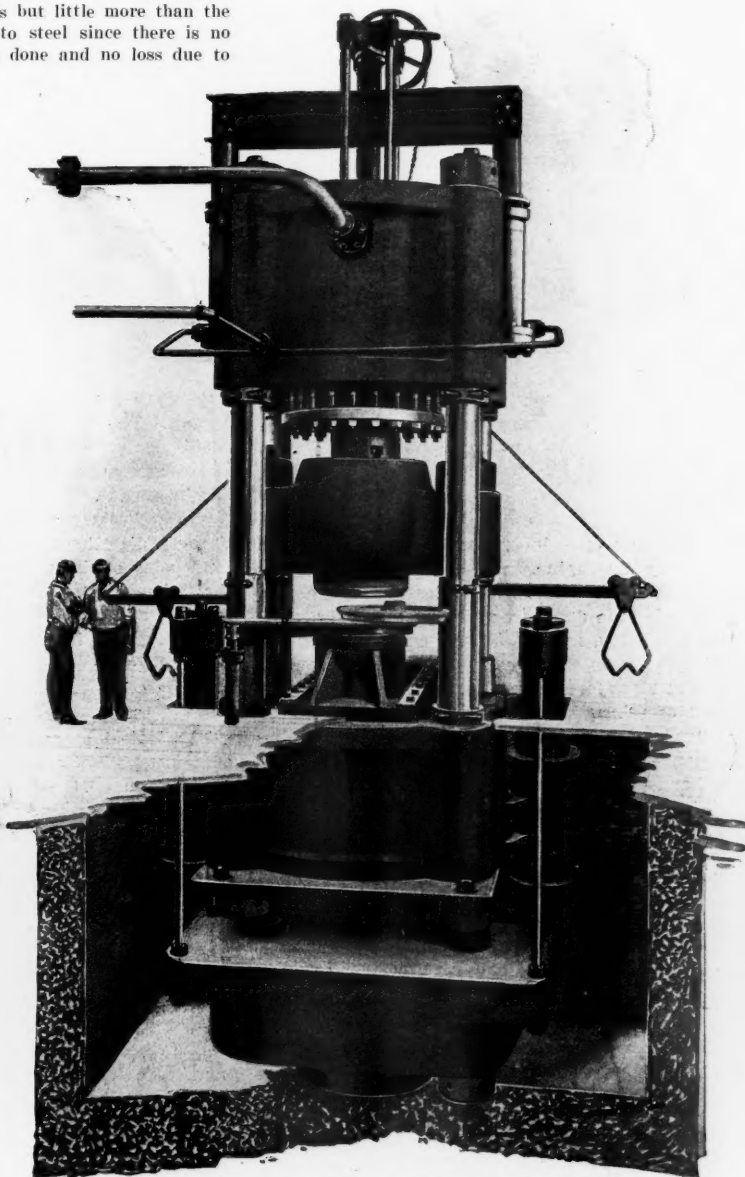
Double Acting Hydraulic Wheel Forging Press.
